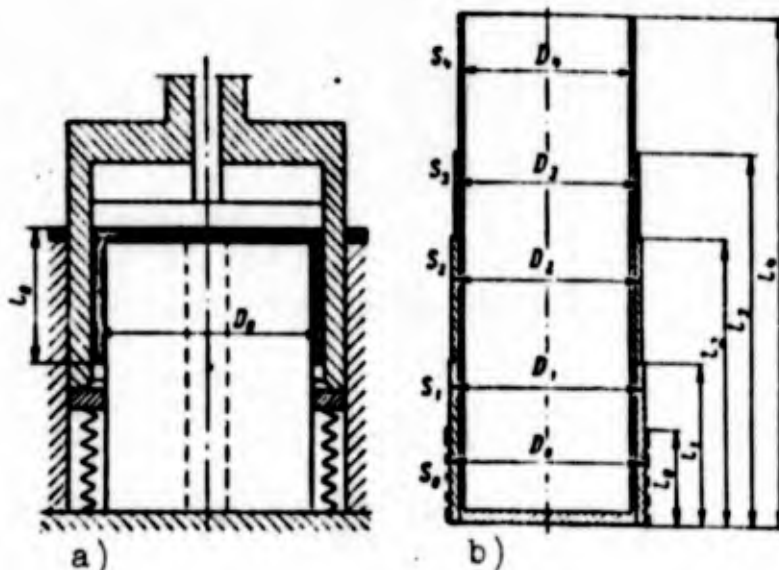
Diagram for drawing a tubular billet. a) punching-drawing of cap; b) sequence of drawing tubular billet from cap.
